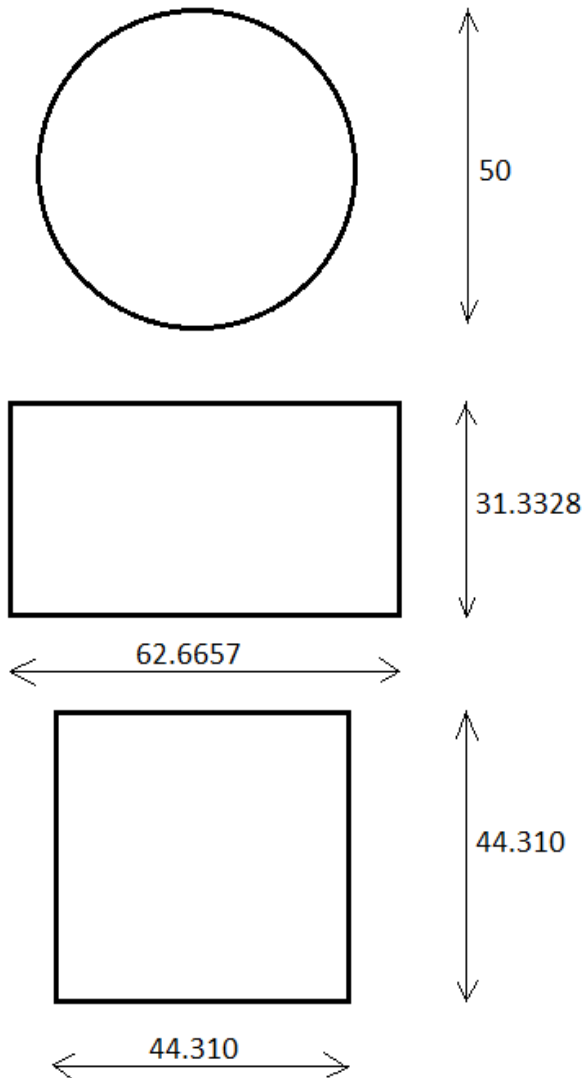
Geometry dimensions of circular, rectangular and square nozzle exit (All dimensions in mm)
